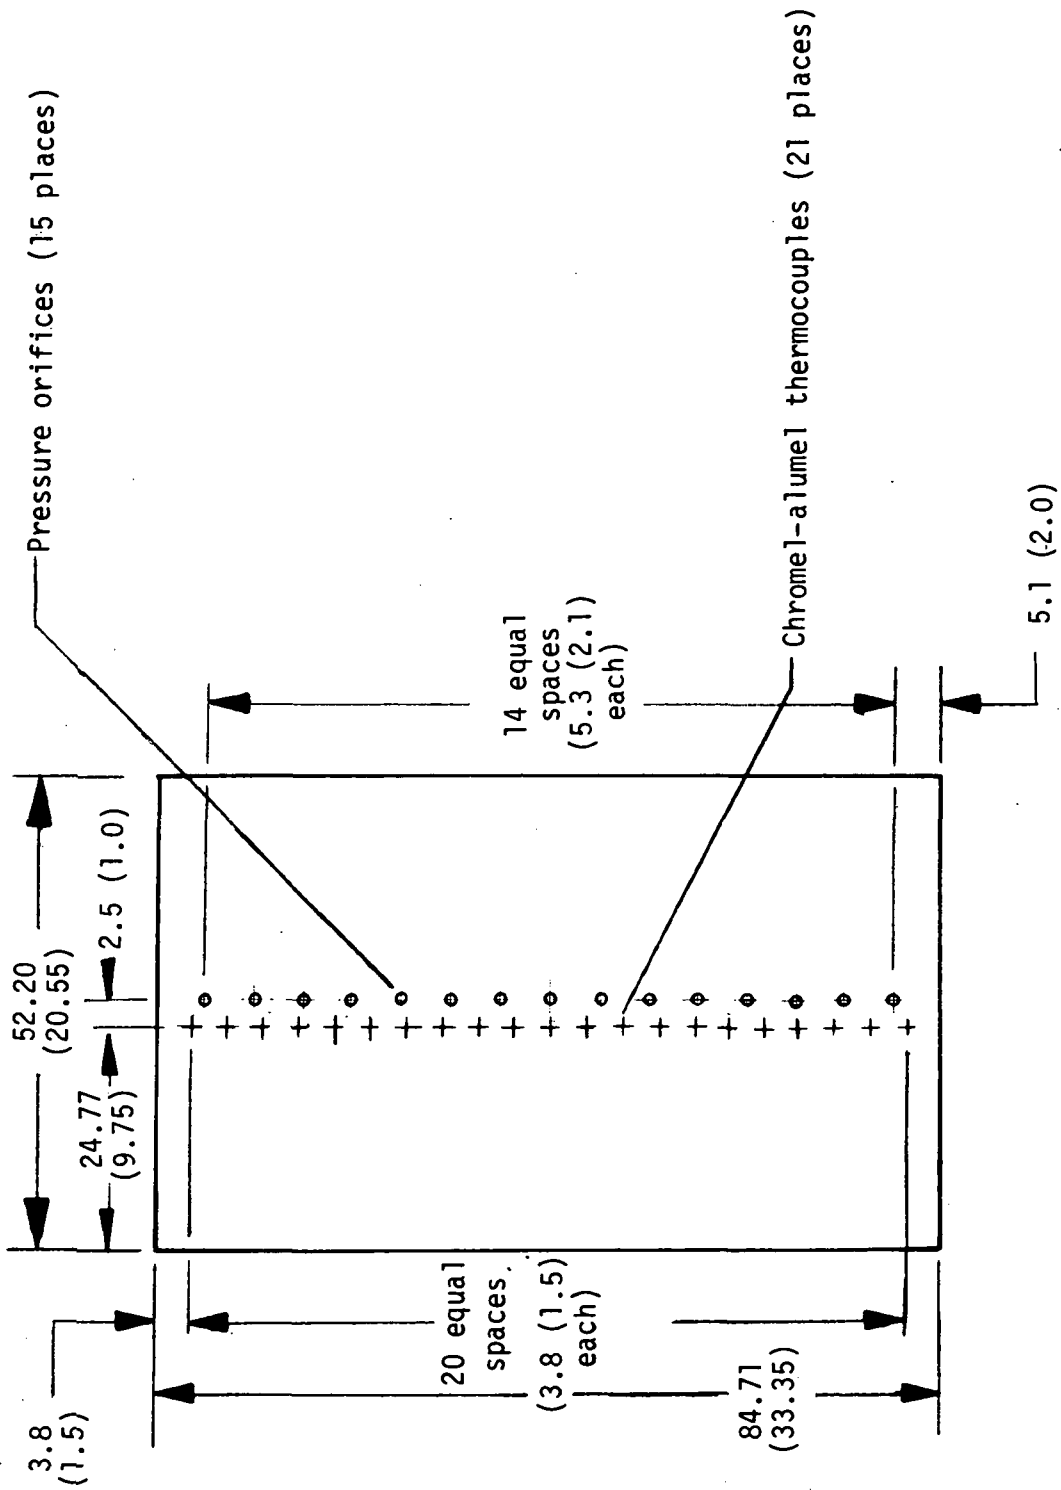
Sketch of flat plate. All dimensions are in centimeters (inches).
